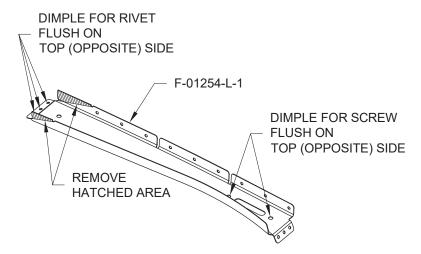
TRIMMING THE F-01254-L-1 & -R-1
